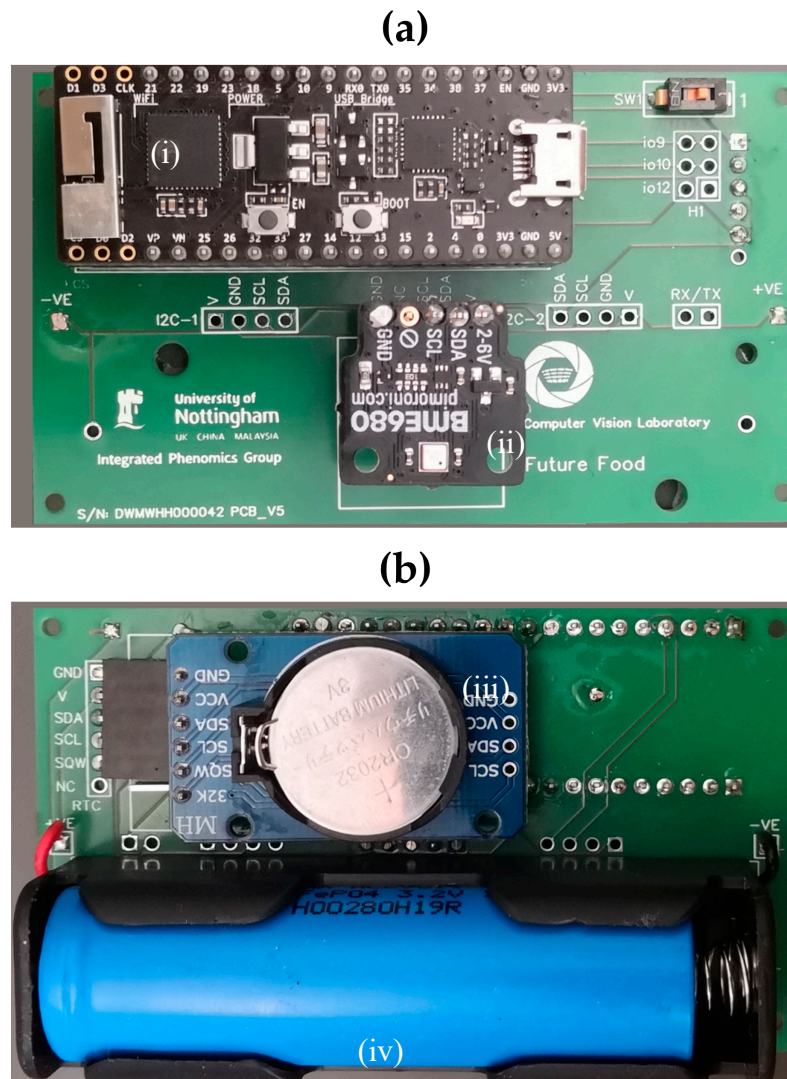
(a) Sensor printed circuit board (PCB) top side. (b) Bottom side. Main components: (i) ESP32 development board, (ii) sensor daughter board, (iii) real-time clock module, and (iv) LiFePO₄ rechargeable battery.
